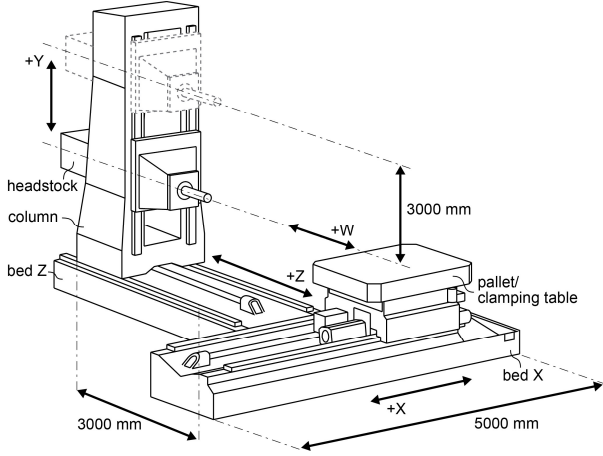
Kinematic description of target machine - horizontal milling centre with a moving table
